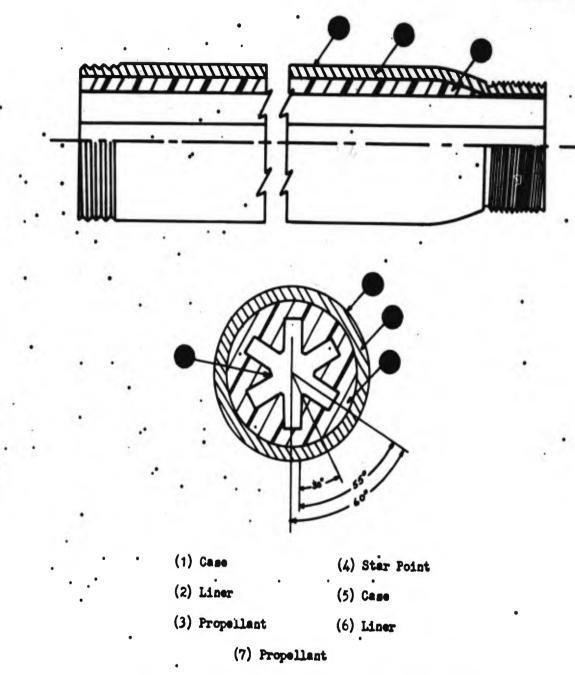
Pyrogen Unit, TU-P-140, Loaded Case Assembly.
